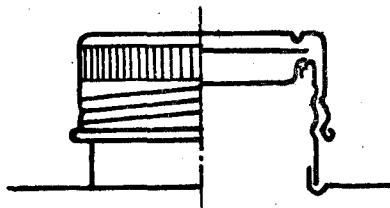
Screw Neck, Cap, Wad and Inner Seal.
